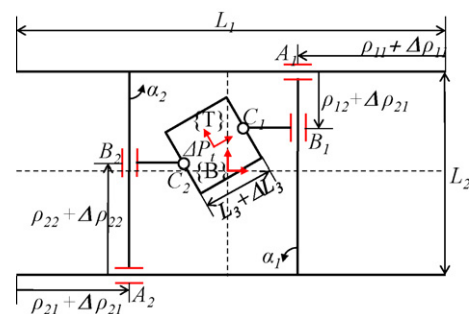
Kinematic error modelling for the three d.o.f. parallel mechanism machine.
